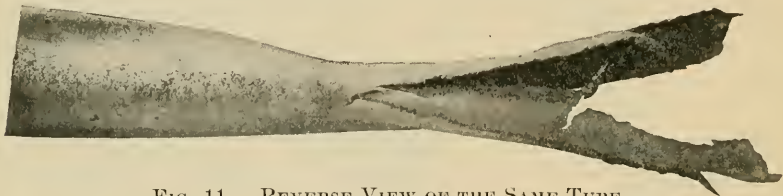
REVERSE VIEW OF THE SAME TUBE.
